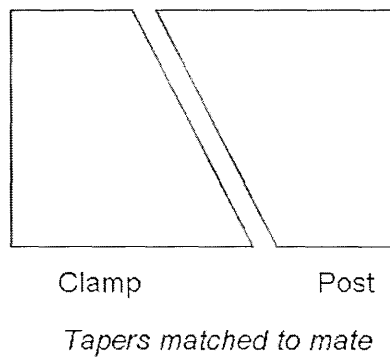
When the waterjet parts are reversed, the tapers can match, for proper contact for clamping
